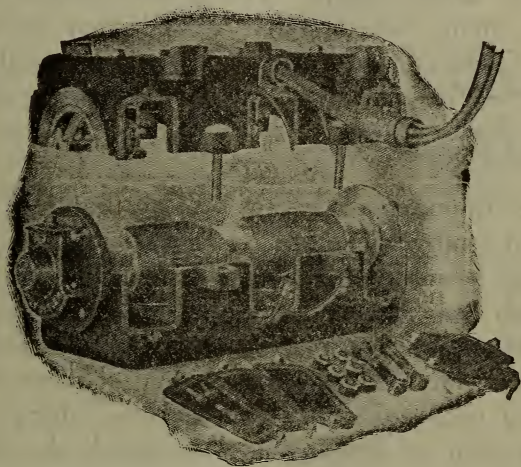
BUCKER WITH LOWER FRAME REMOVED SHOWING ARMATURE IN LOWER FRAME.
